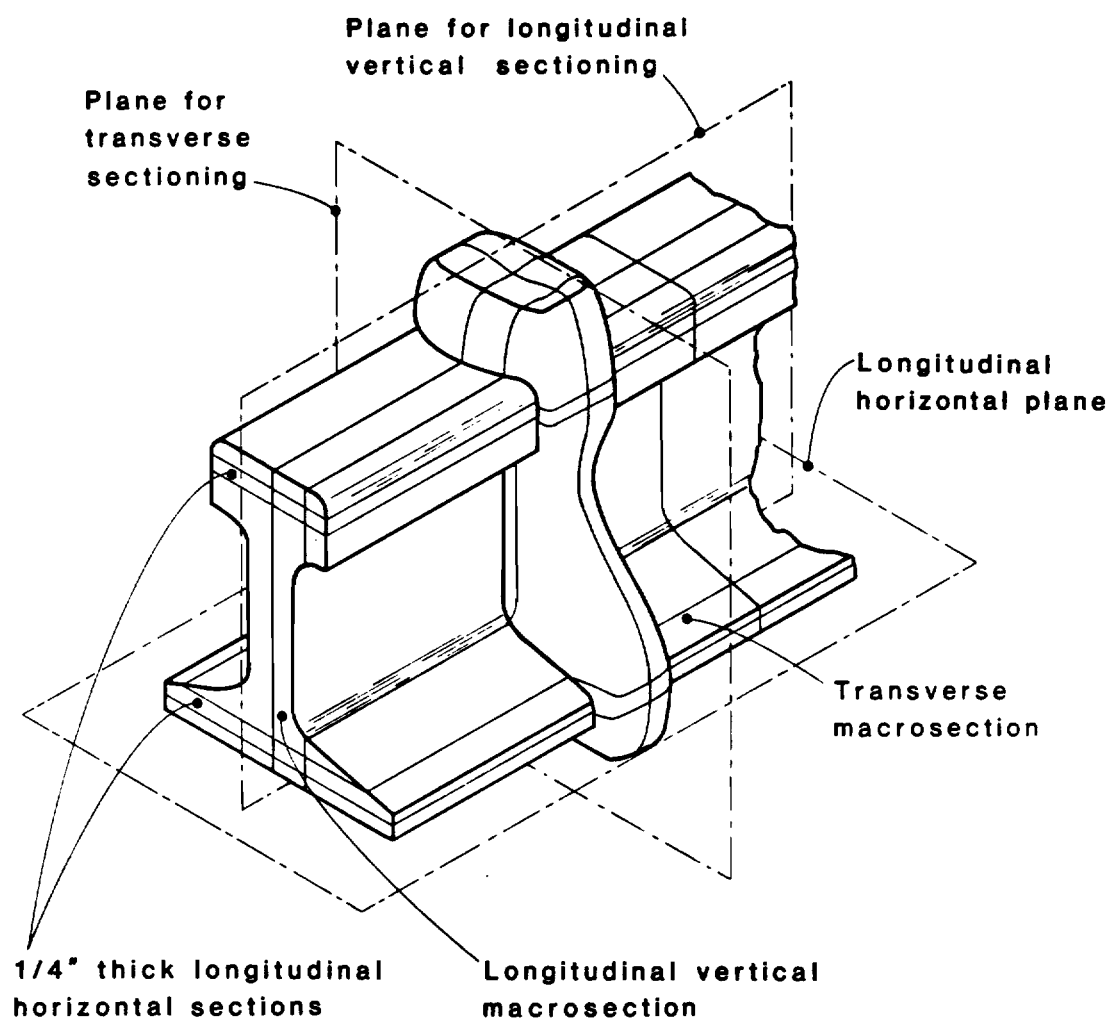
MACROSECTIONING DIAGRAM FOR RAIL WELDS.
